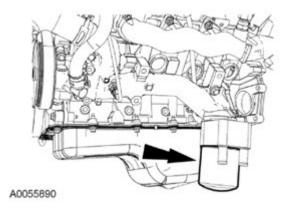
Locating Oil Filter Courtesy of FORD MOTOR CO.
